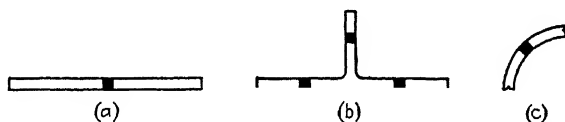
Recommended welds for magnesium alloy.
